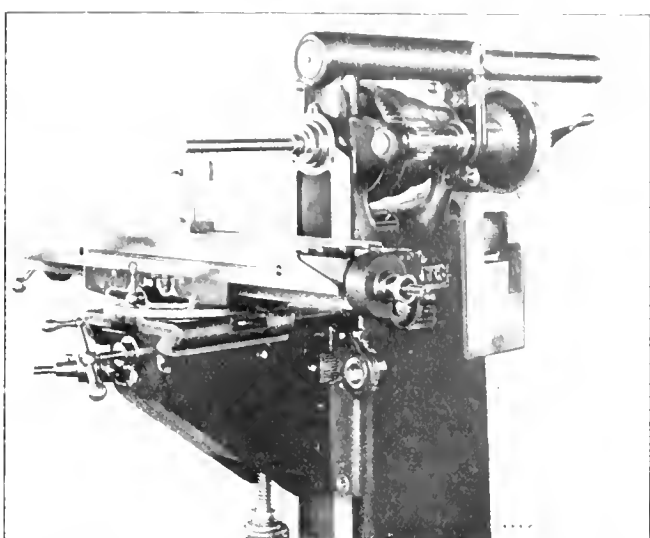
Test to show Parallelism of Knee with Spindle. Test is made by clamping Indicator to Table and moving Saddle across Knee with Screw.
